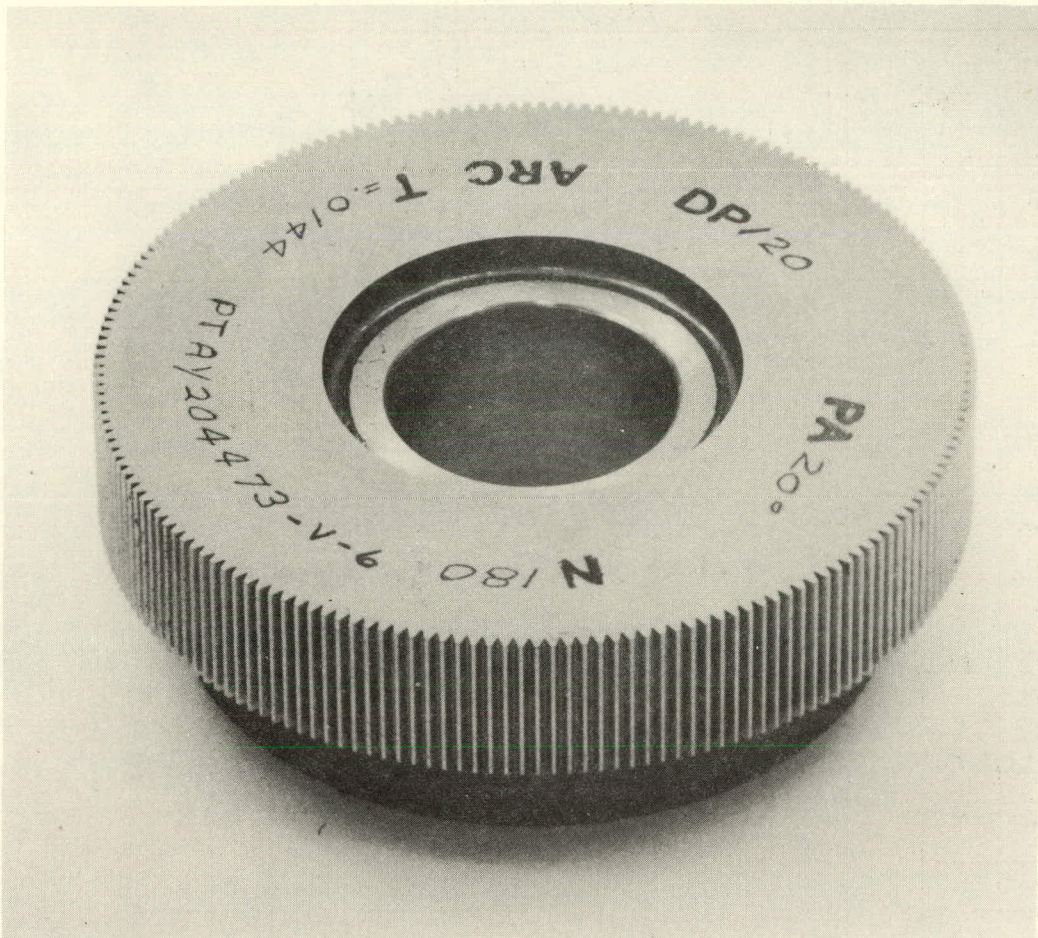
Master Gear and Staging Fixture for Redliner Gear Checker
